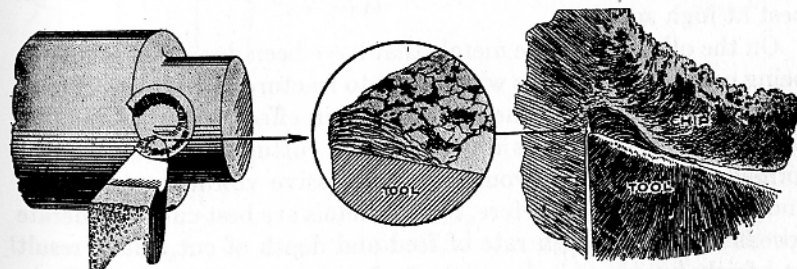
The false cutting edge. (The Shell Oil Company)
